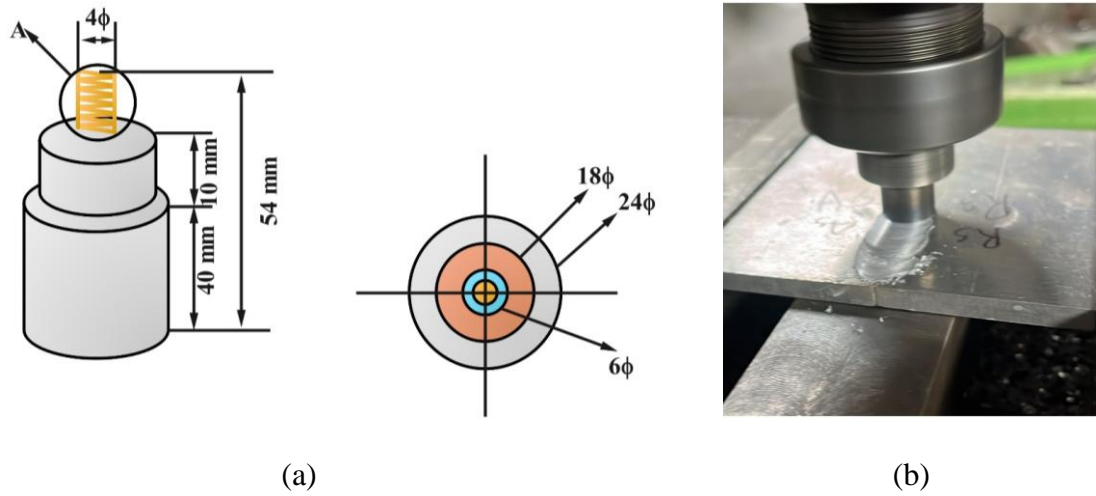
(a) Tool dimensions (b) friction stir welding machine
